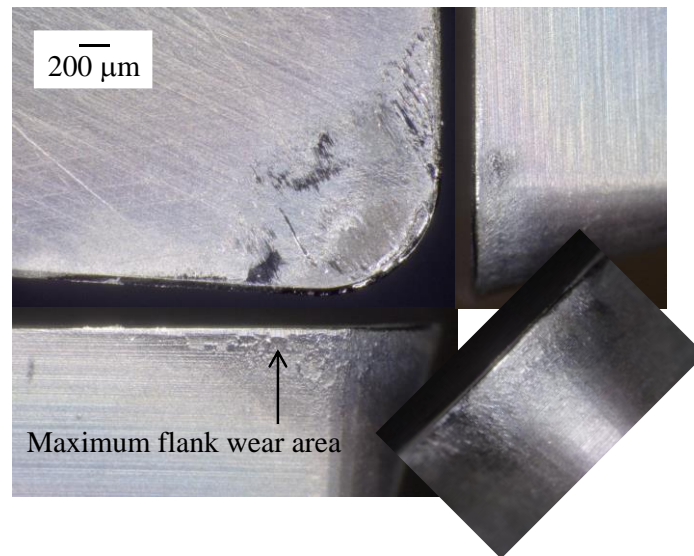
Each face of the insert in tool axis offset 6 mm after tool life experiment.
